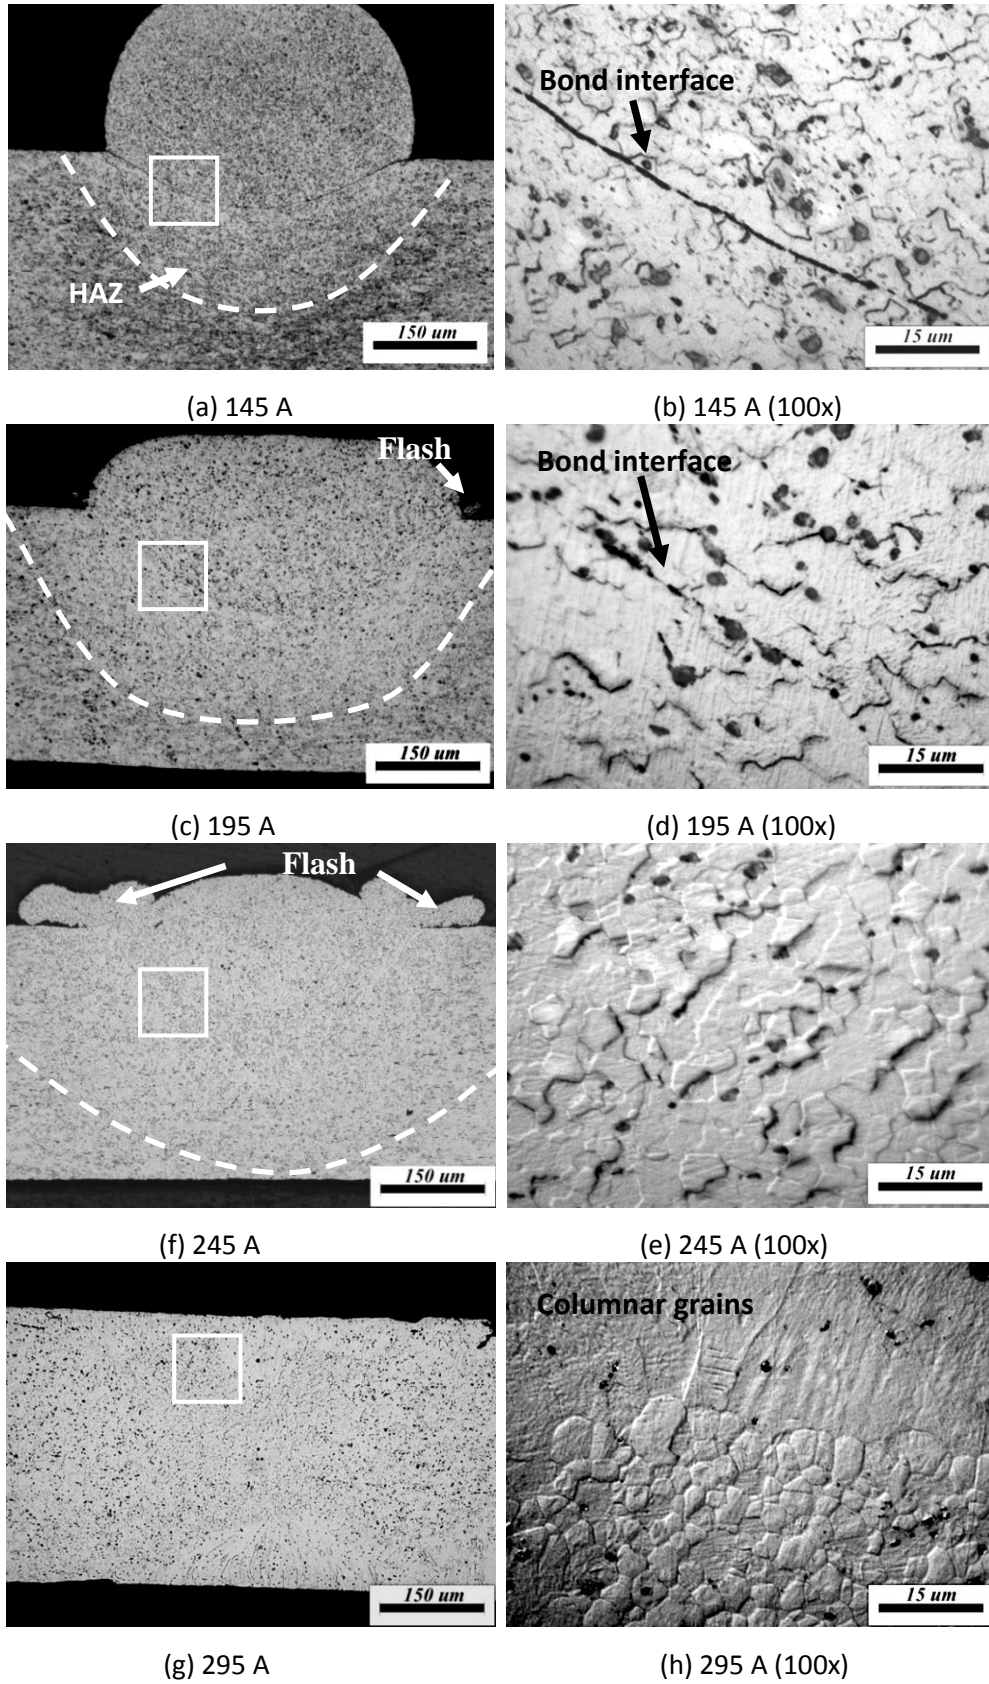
Cross sections of joints welded at different welding currents
